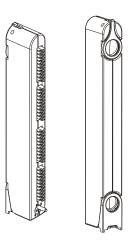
Terminal Block (TB) Holder-Front and Back View
